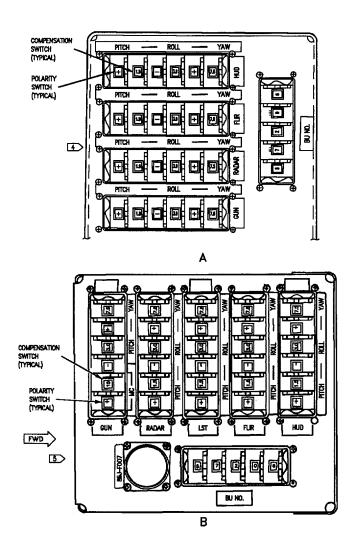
Electrical Boresight Compensation System Locator (Sheet 3)
